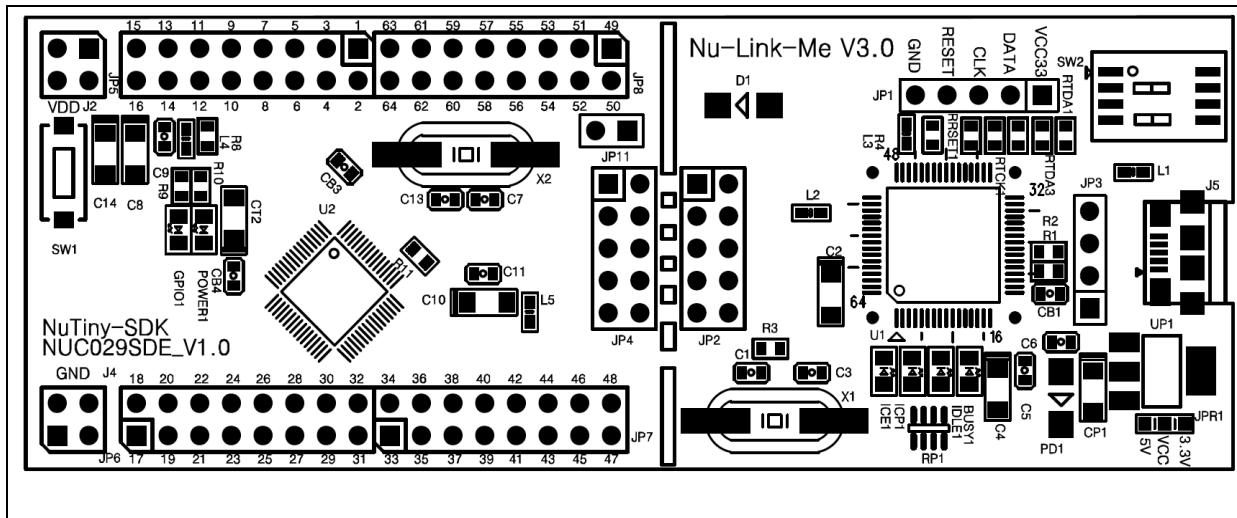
NuTiny-SDK-NUC029SDE PCB Placement
